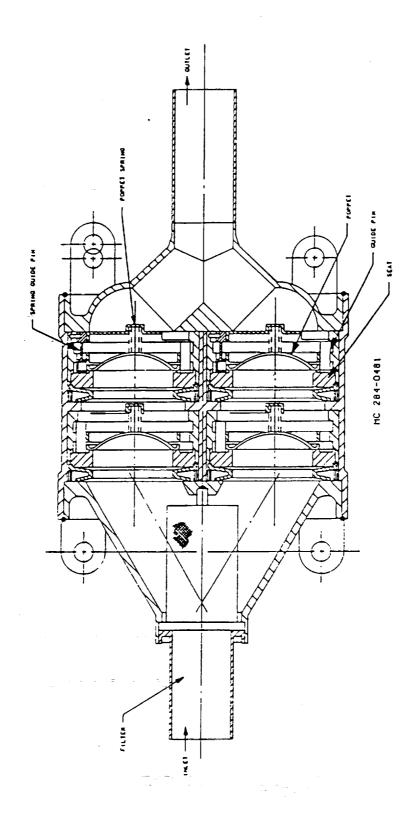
QUAD CHECK VALVE ASSEMBLY
